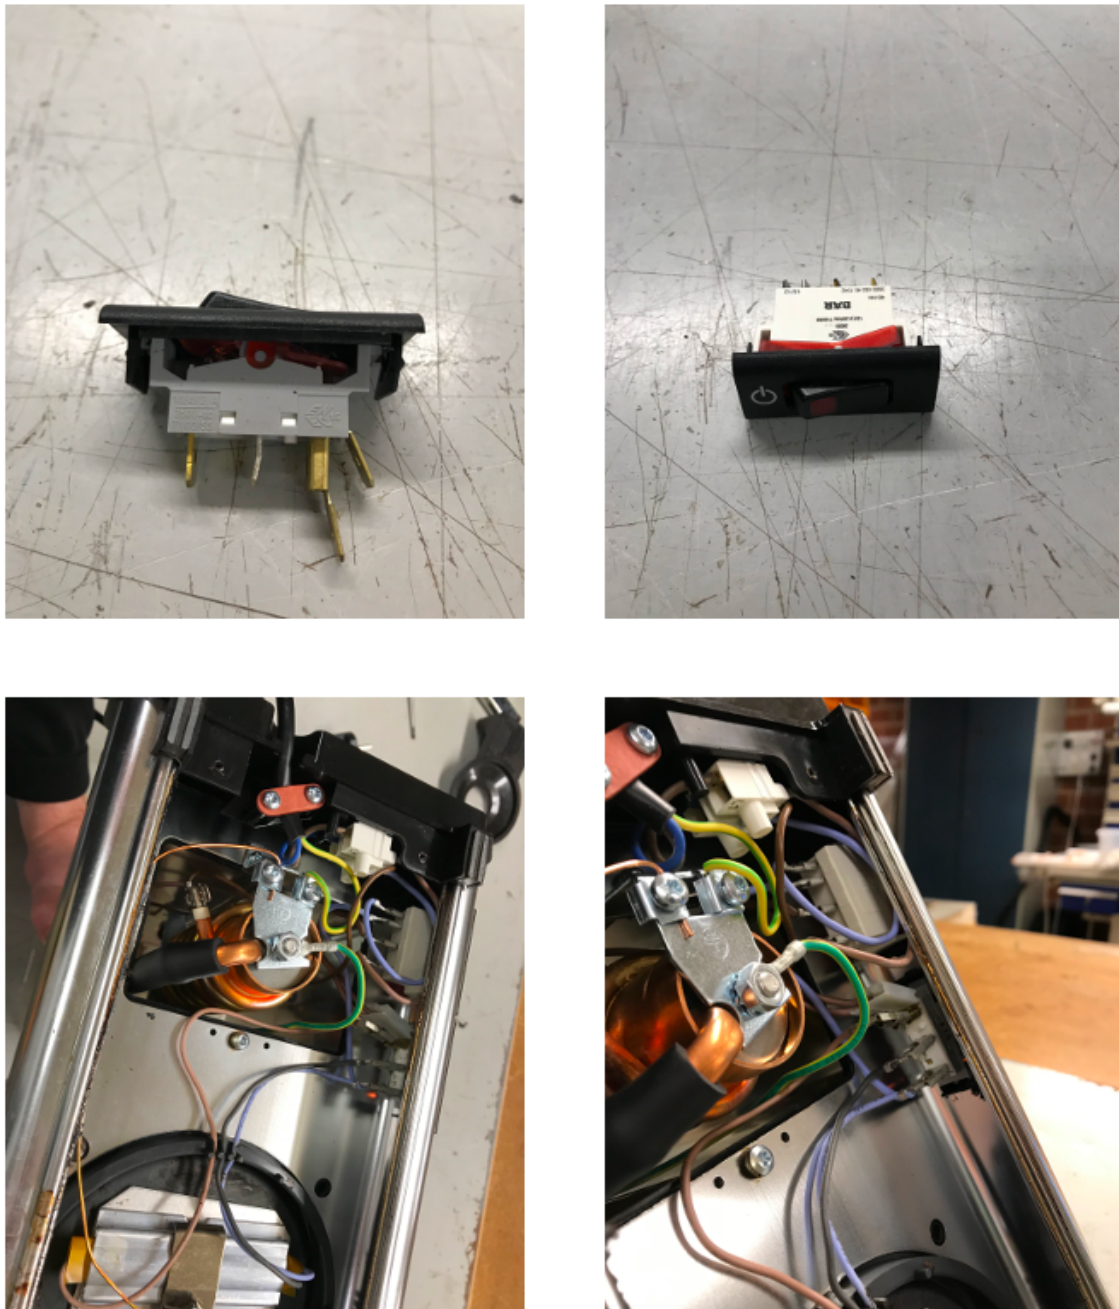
Top right and left: Button/contactor module. Bottom right and left: Button/contactor placement and surrounding components.
